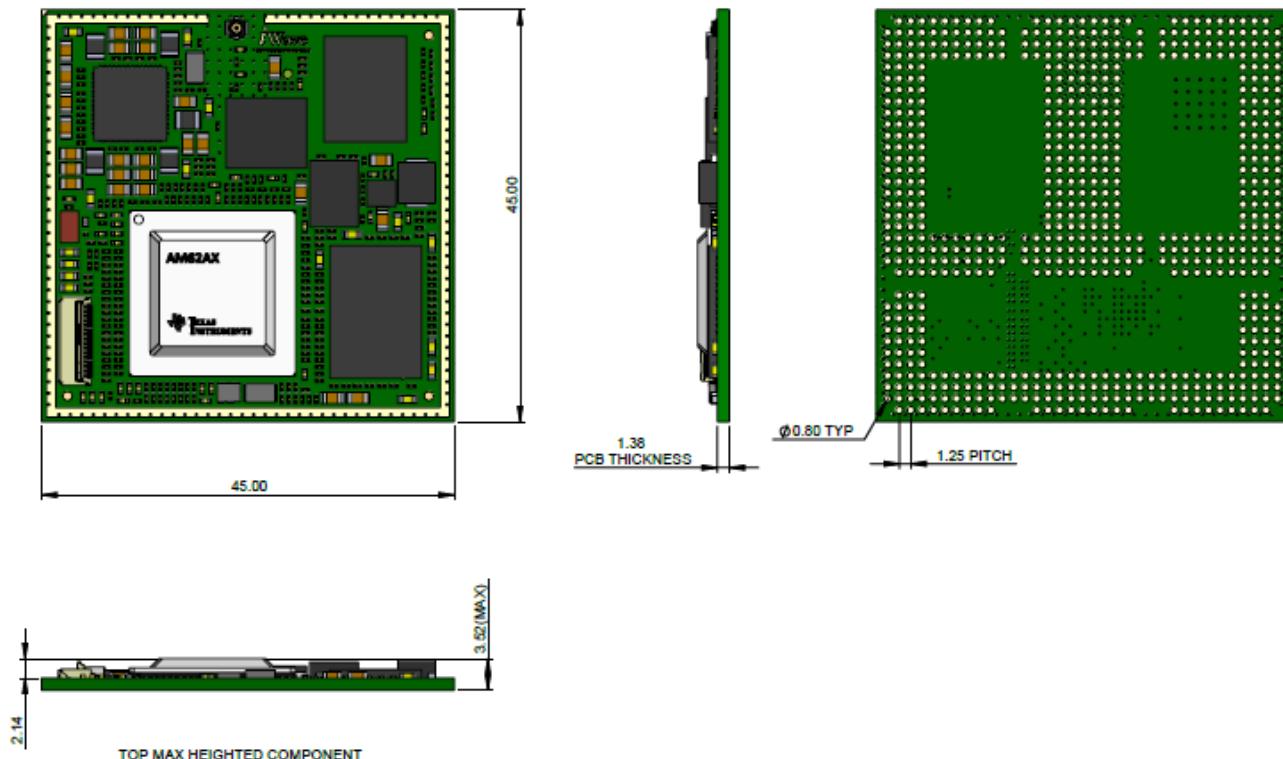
Mechanical dimensions of AM62Ax OSM LGA Module
